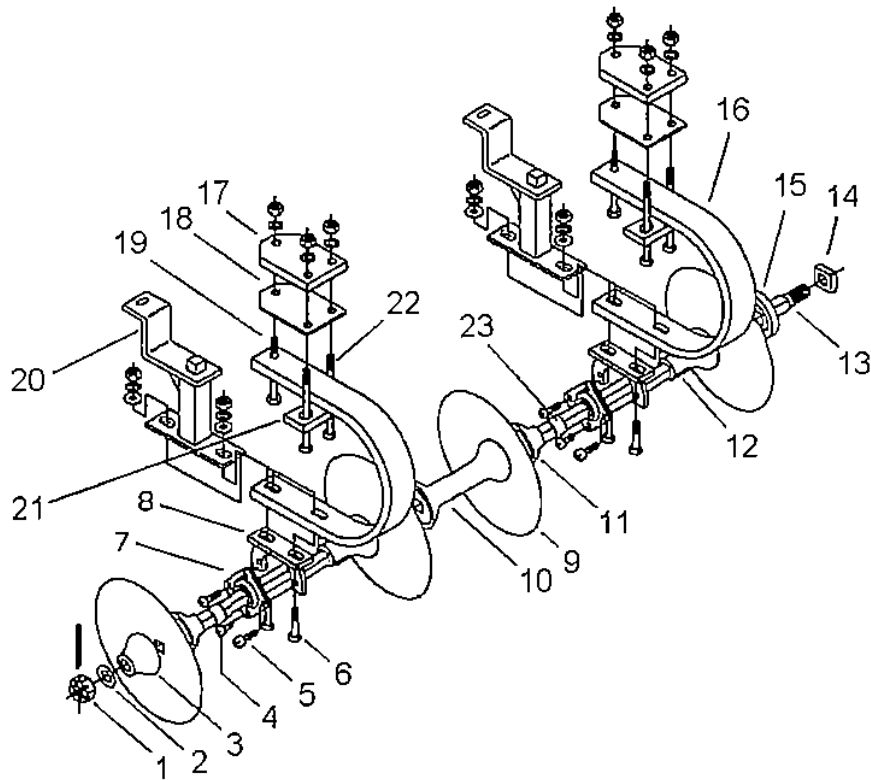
GANG COMPONENTS 1 1/8" AXLE (SPRING)
